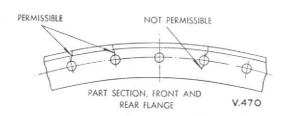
Limits of cracking and machining dimensions for turbine shroud.
